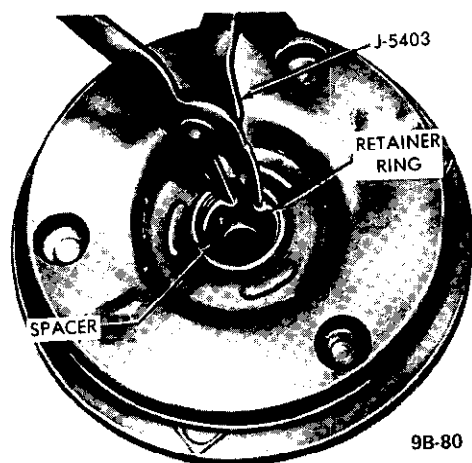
B-106 Removing or Installing Retainer Ring in Clutch Drive Plate
